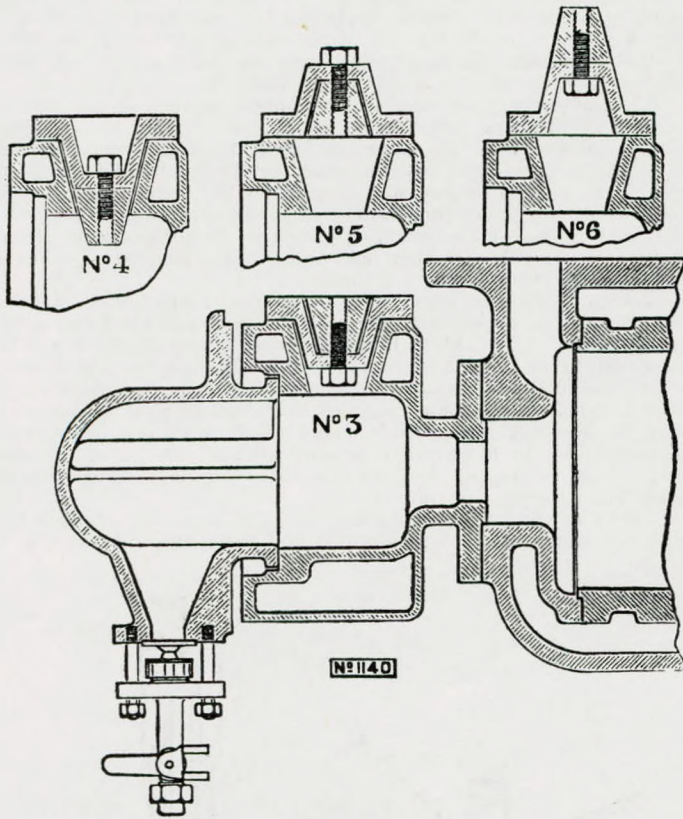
Compression adjustment, Hornsby-Akroyd engine.
